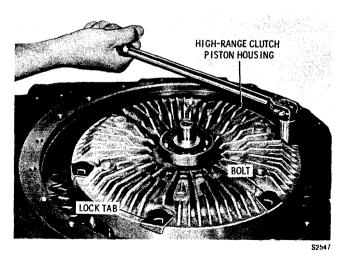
Removing high-range clutch piston housing bolts (TT 2221, 2421-1 without converter-driven PTO)
